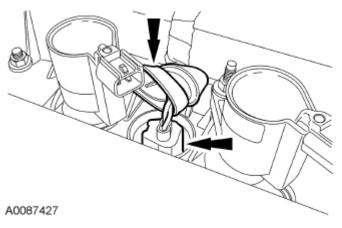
Locating Fuel Rail Insulator Courtesy of FORD MOTOR CO.
